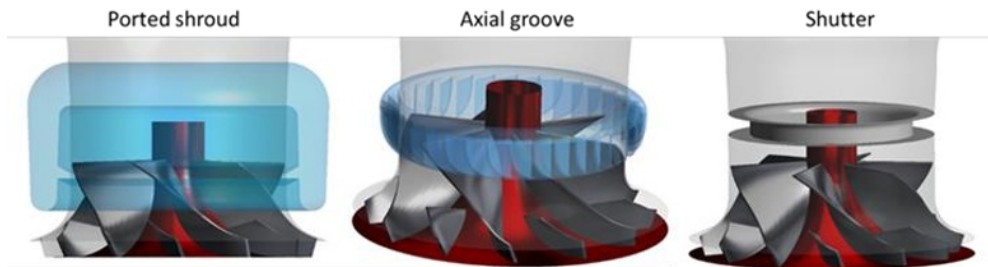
3D views of the compressor with the passive devices for the casing treatment.
